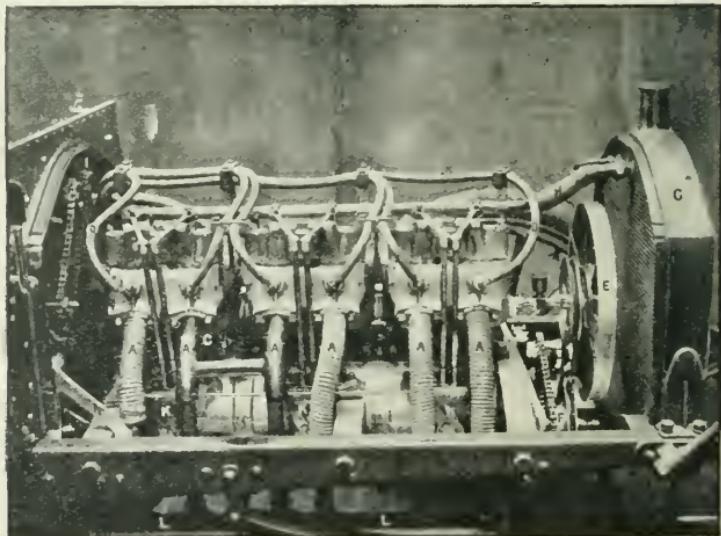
Side Elevation of six-cylinder Napier Motor
